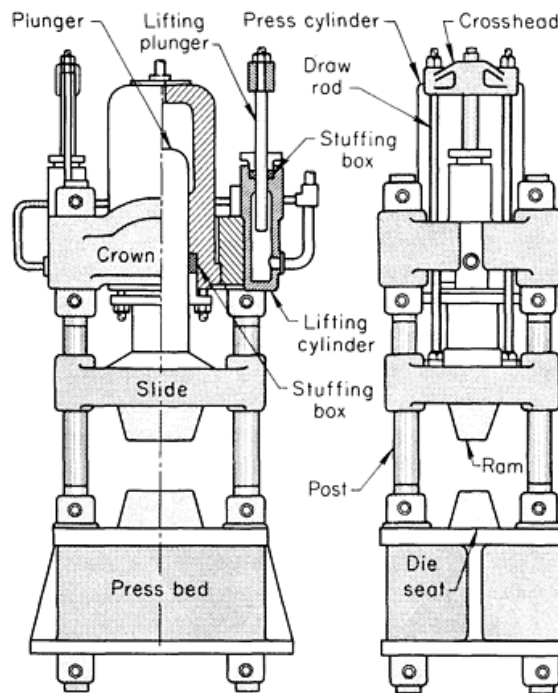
Principal components of a four-post hydraulic press for closed-die forging
